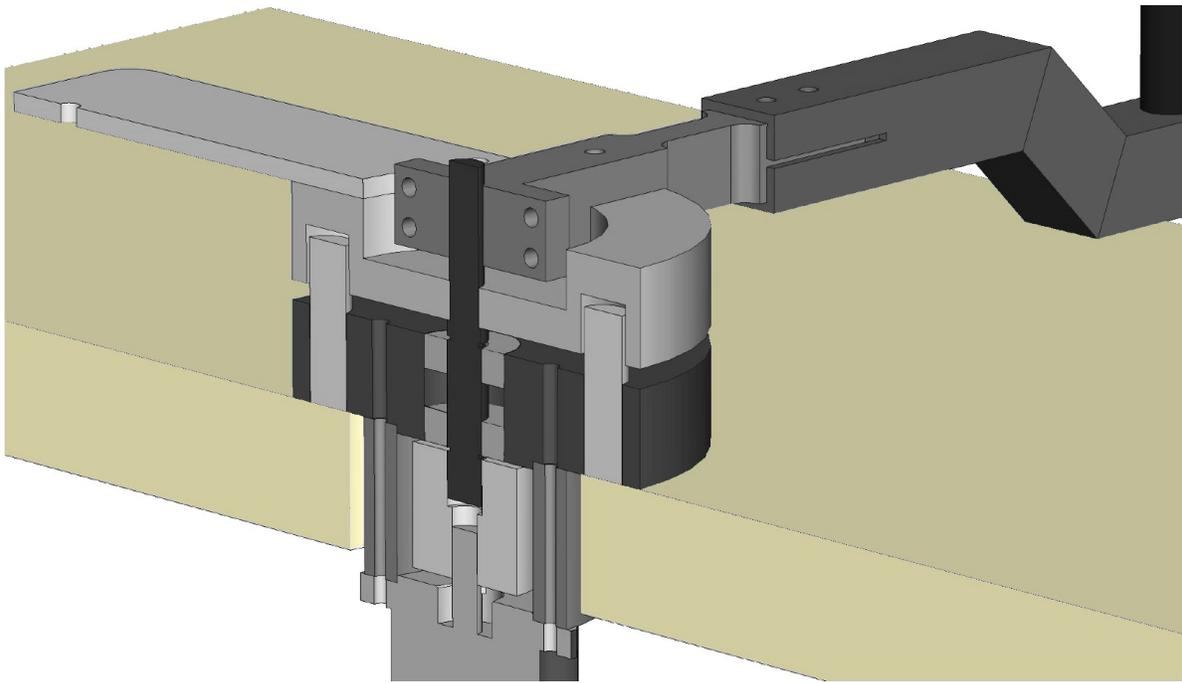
Internal view of the center of the device. This view shows the internal connections between the motor, handles, and table. The bearings support all forces and moments from the handles.
